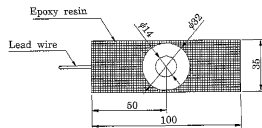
Configuration and dimension of test specimen (unit: mm)
